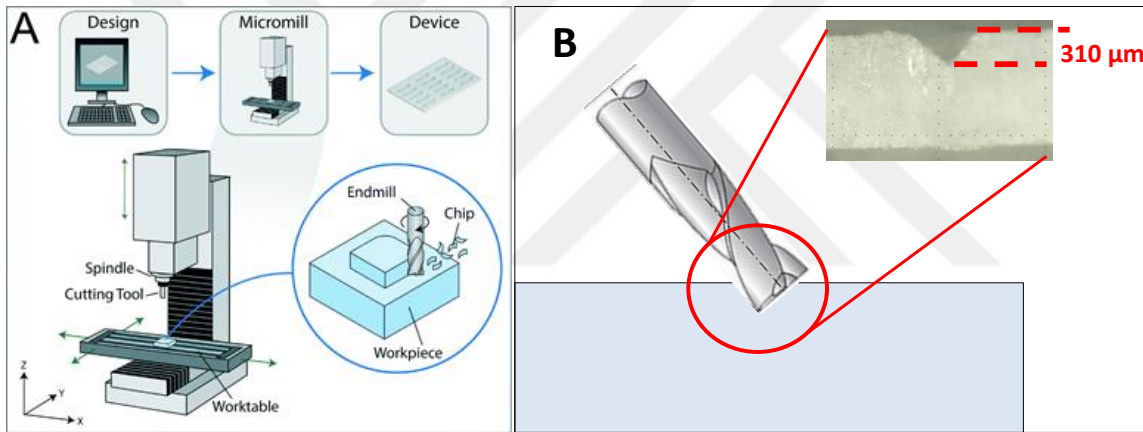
a) Micro milling process: cartridges is designed using a Computer Aided Design (CAD) tool, g-code is generated using Computer Aided Manufacturing (CAM) tool, cartridges are fabricated with CNC machine b) V groove machining by tilting the cutting tool by 45°
